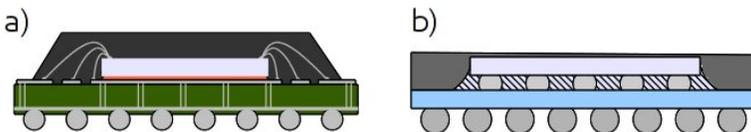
A schematic view on BGA packages with wirebonded die (a) and with flip-chip mounted die (b)
